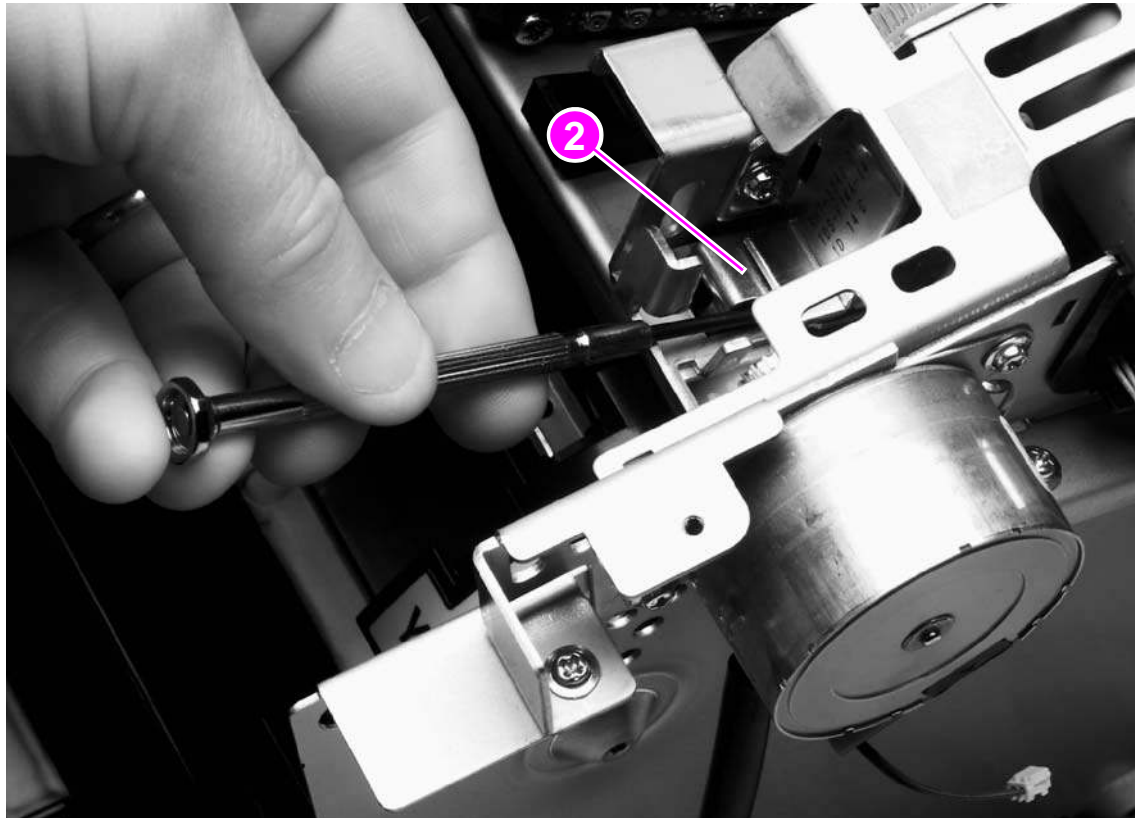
Manually rotating the print-cartridge carousel (no guide installed)
